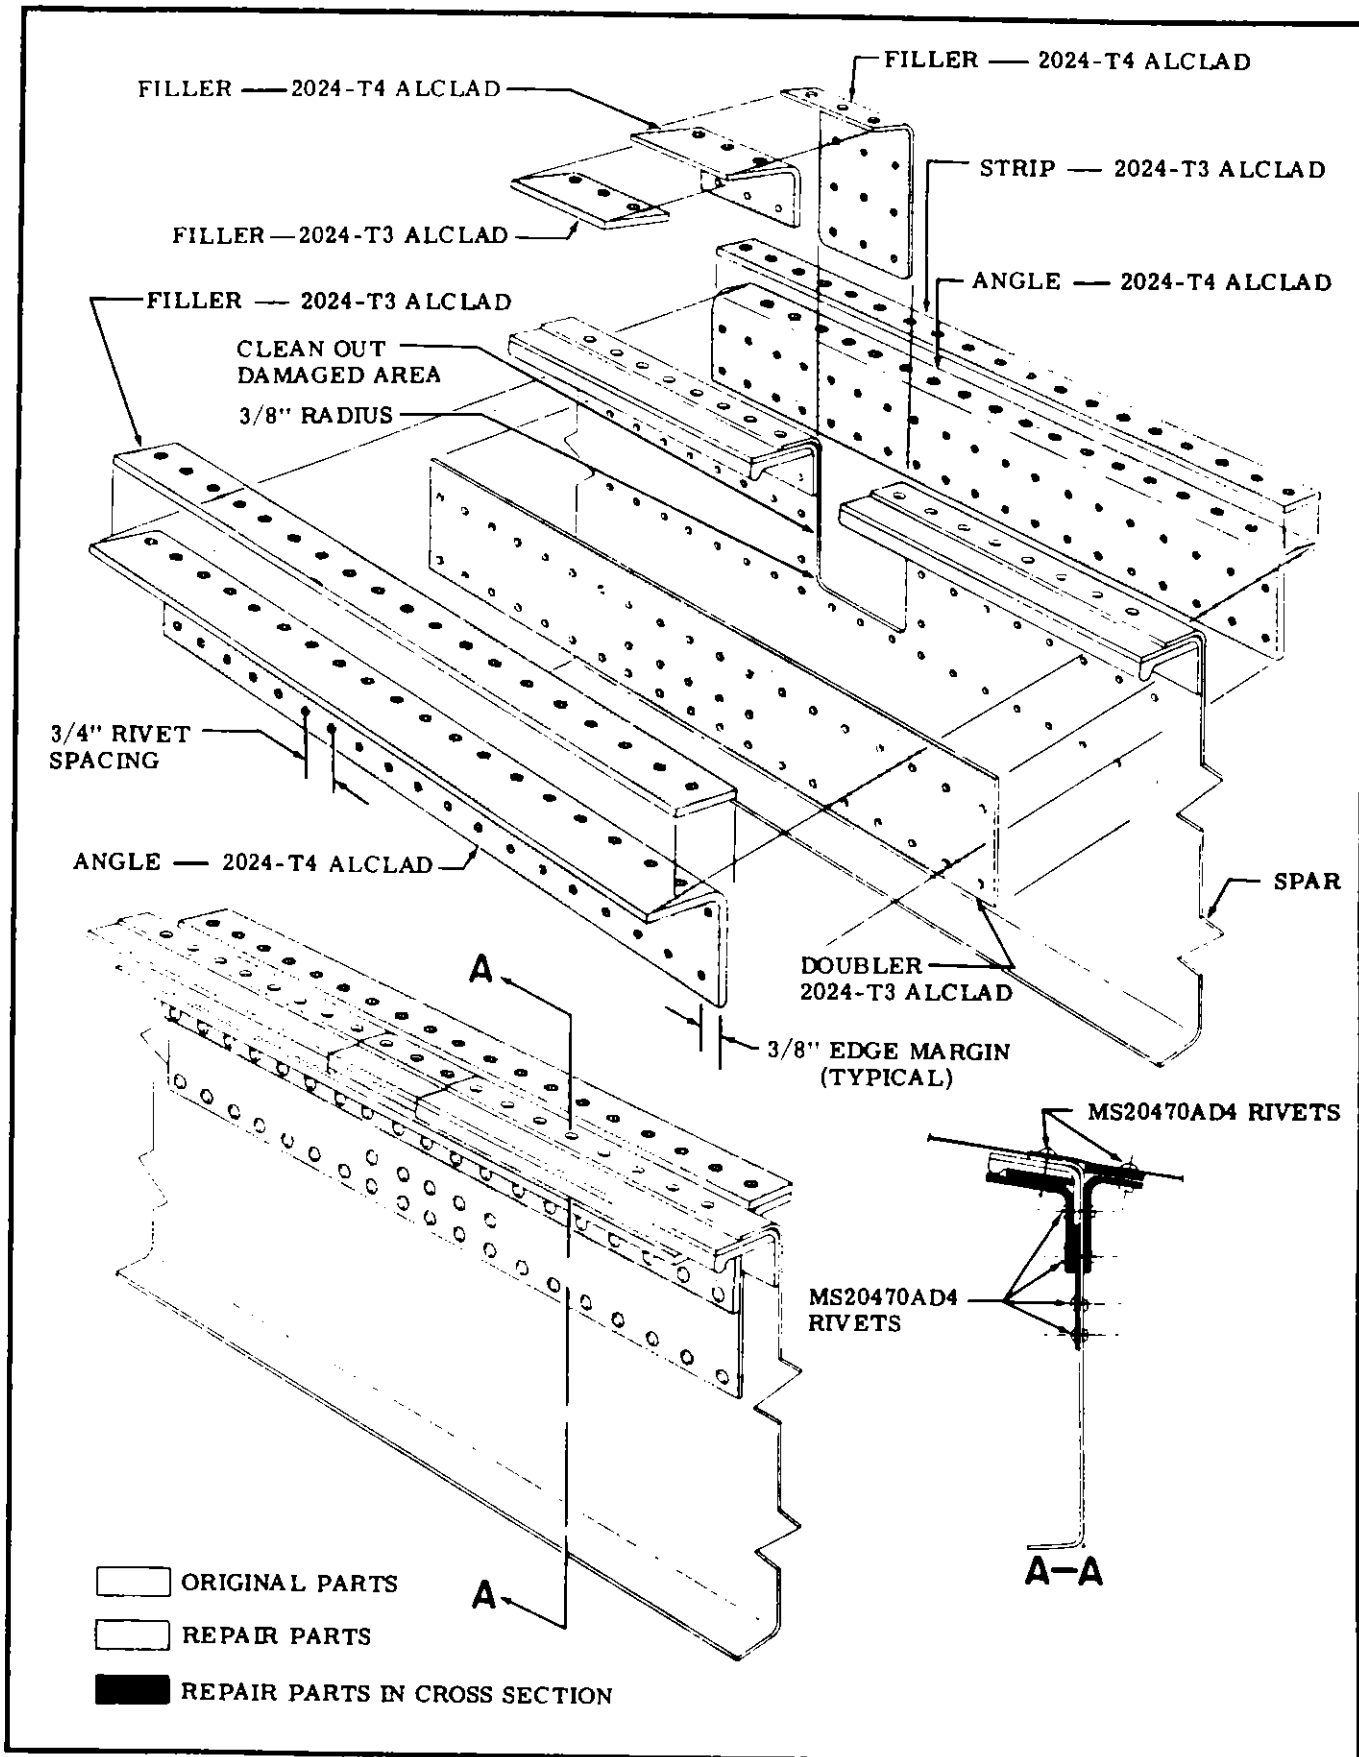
Wing Spar Repair (Sheet 1 of 4)
